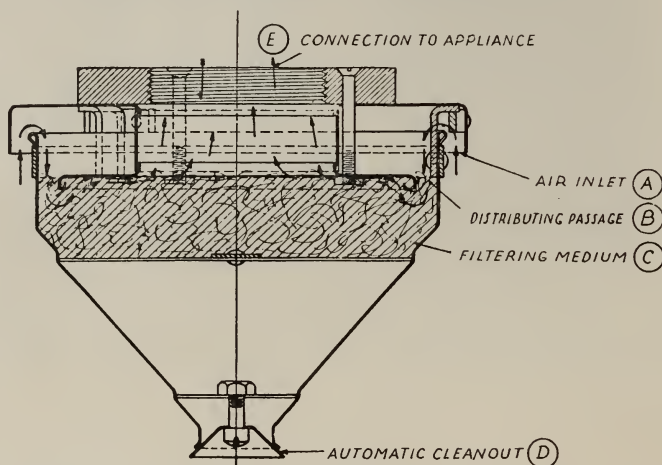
No. 66, Eddy (Spencer) (section view). A combination inertia and dry curled hair filter cleaner designed especially for air compressors but usable for gasoline engines.
